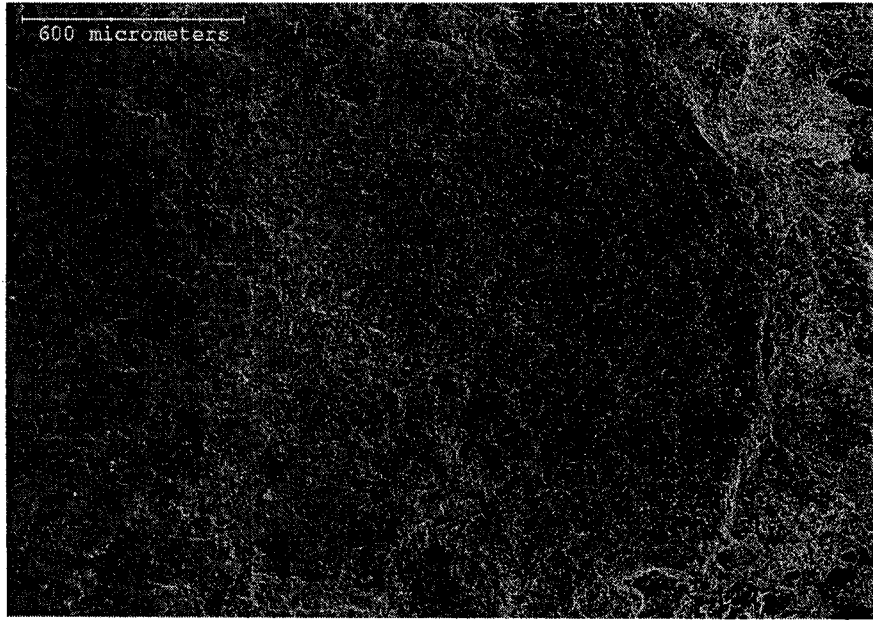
Fracture Surface of Test Specimen T32-2
